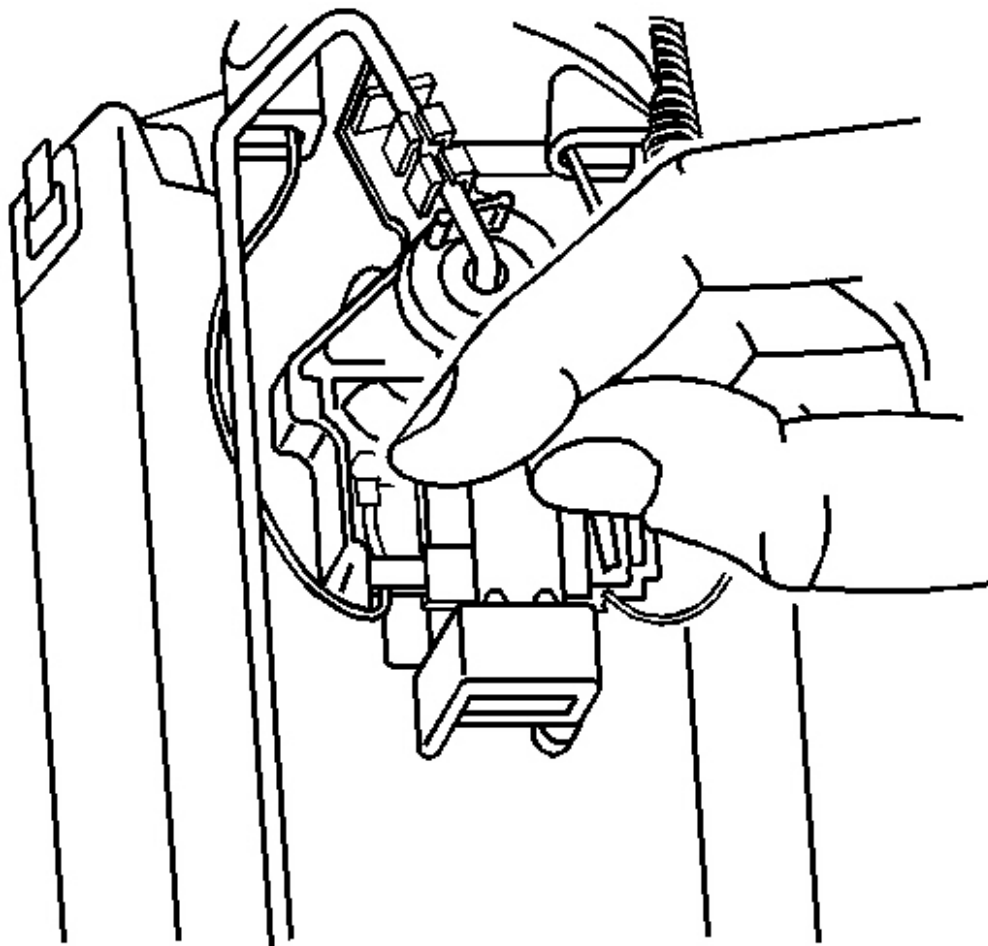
Removing Fuel Level Sensor Retaining Clip
